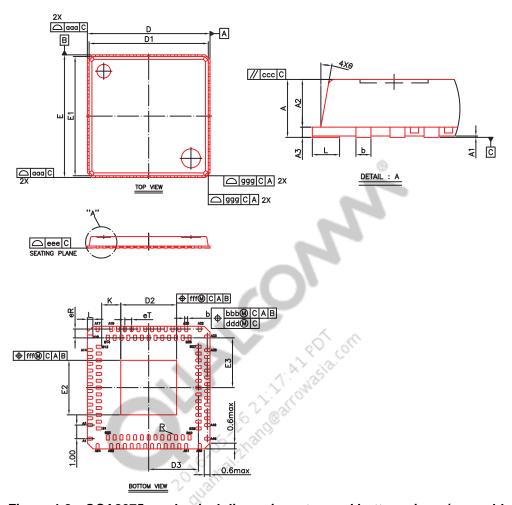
QCA8075 mechanical dimensions, top and bottom views (assembly 2)
